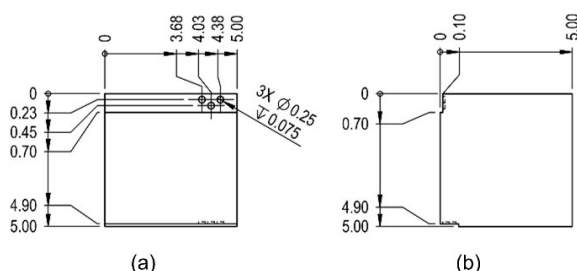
Technical drawing of the designed reference part: top (a) and side (b) view. Nominal values are reported in millimetres.
